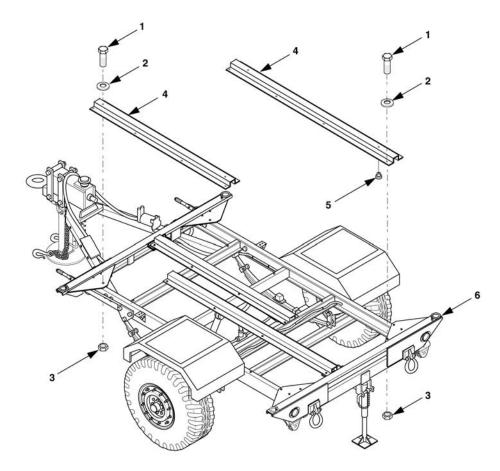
Replace AN/MJQ-35 Generator Mounting Rail.
